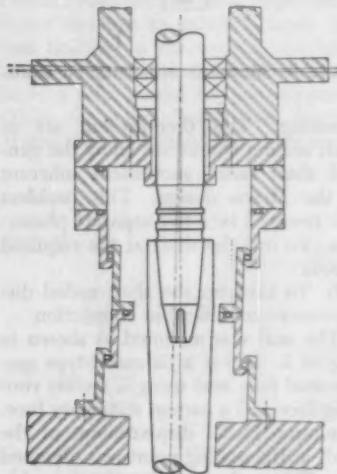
Shaft swing to right in PC-30 centrifuge.
